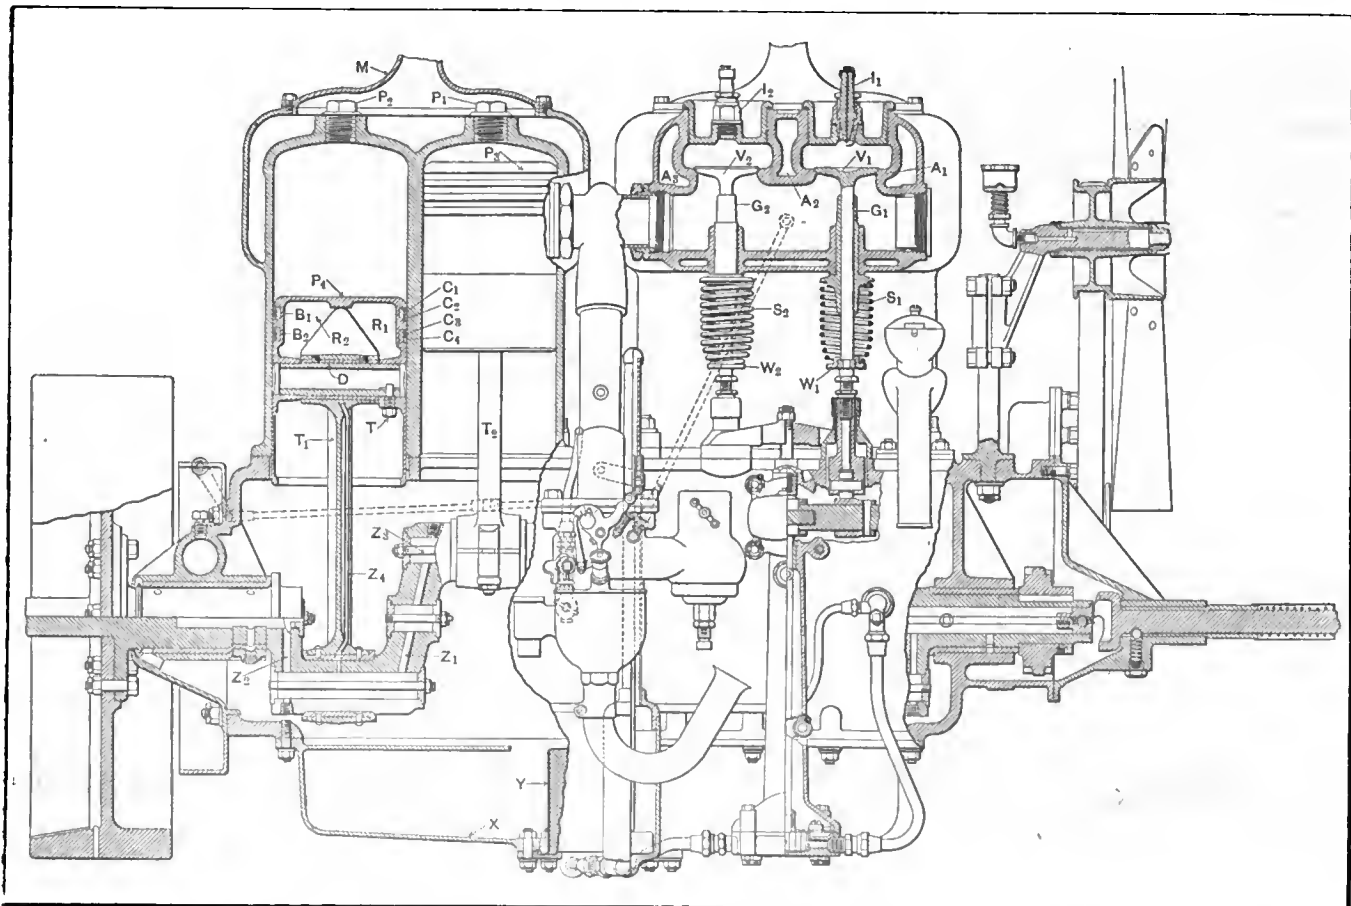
Right side of the motor, in part section, disclosing light reciprocating parts, a competent oiling system, and nice details
